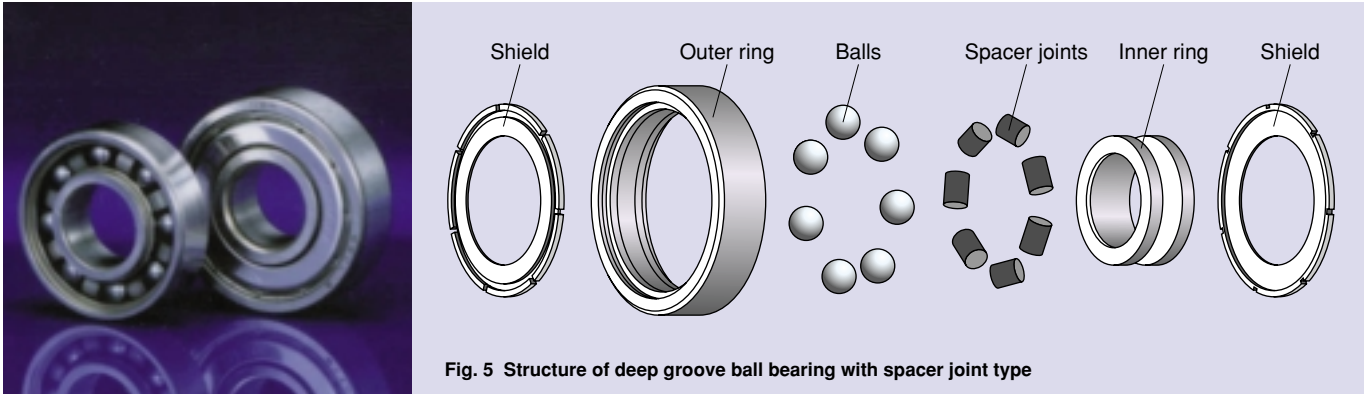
Structure of deep groove ball bearing with spacer joint type
